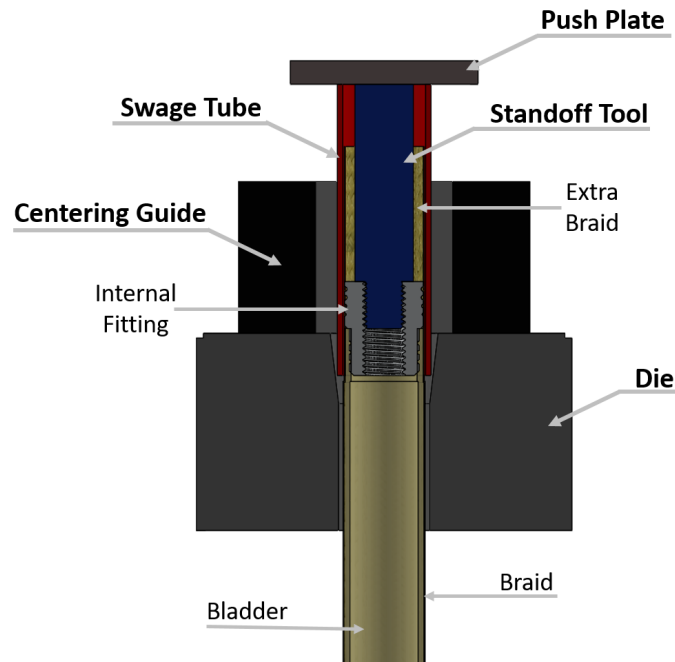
Swage tools (bolded) and FAM assembly in alignment prior to swaging
